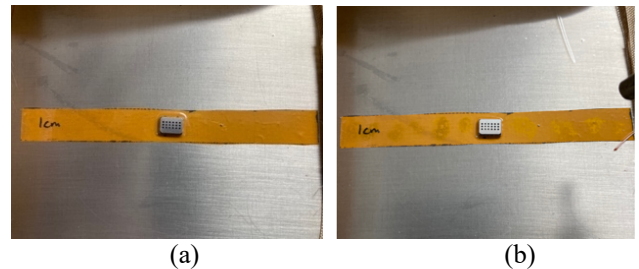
Showing (a) vacuum formed using PU with tenting around the die (b) reduced tenting due to the use of a heat gun and applying the vacuum again.
